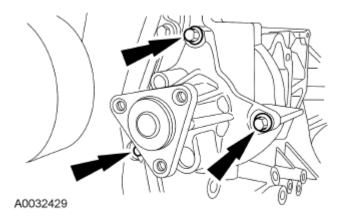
Locating Bolts And Accessory Drive Belt Idler Pulley Bracket Courtesy of FORD MOTOR CO.
